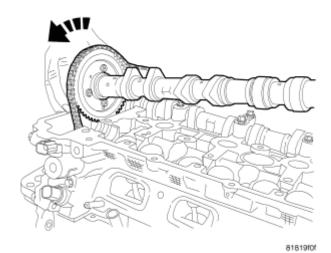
ROLL CAMSHAFT Courtesy of CHRYSLER LLC
